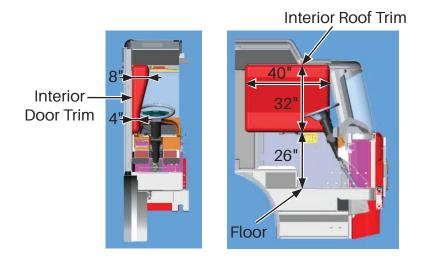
Driver Side - Side Air Bag Deployment Zone
